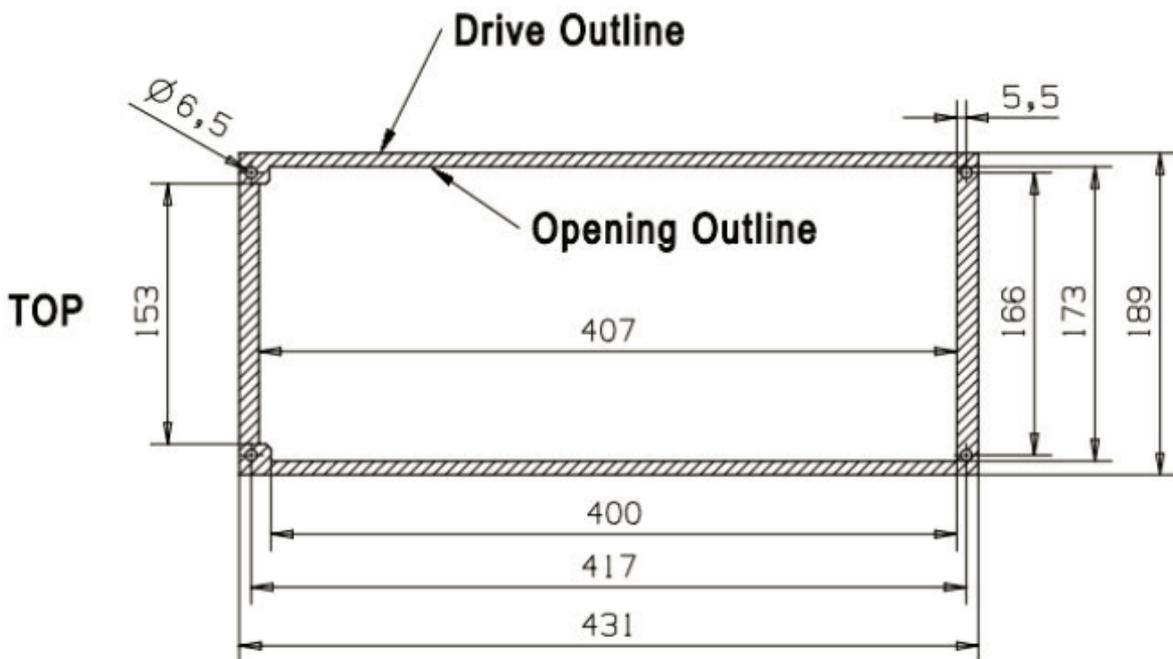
Flange mounting cutout dimensions for MI5 (Unit: mm)
